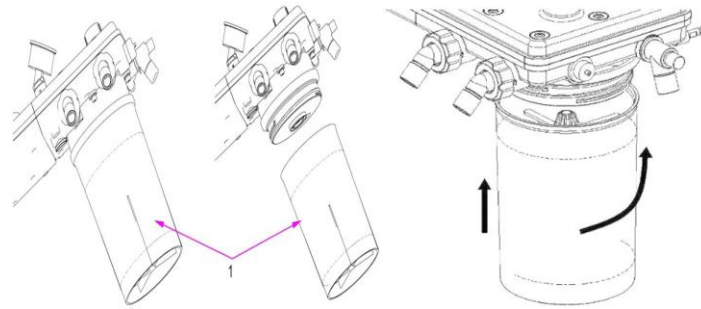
Assemble /Disassemble, lock/ unlock of Canister
